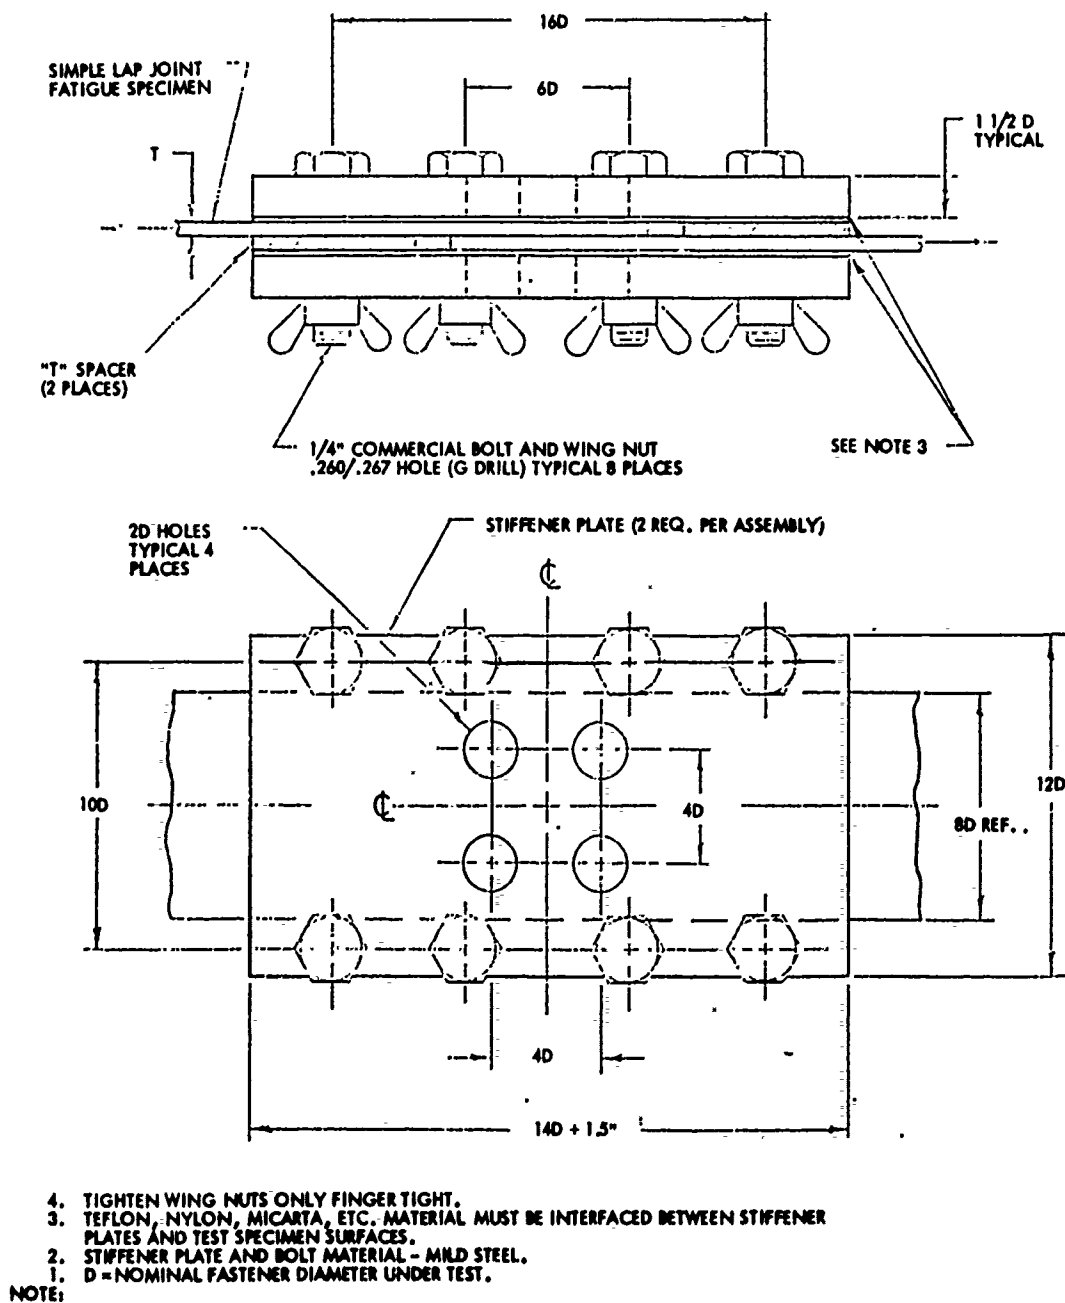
Details of "Sandwich" Type Specimen Restraint Fixture
